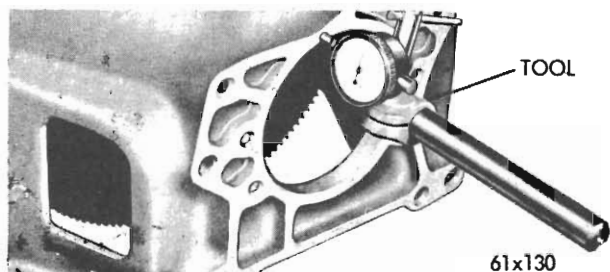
Checking clutch housing alignment (Tool E6C10)
